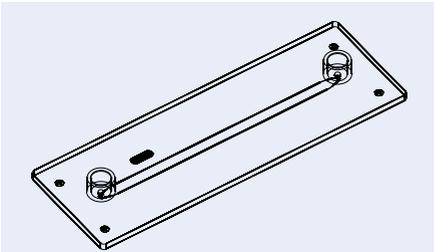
Schematic drawing of the one channel chip with Luer interface 268 to be equipped with double-sided adhesive tape
